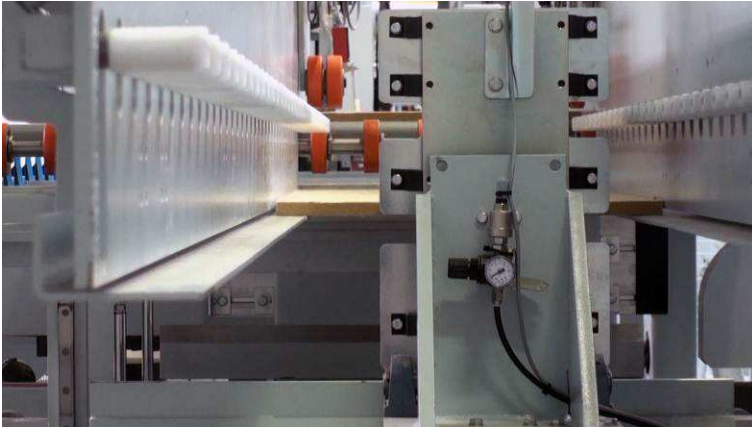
Angular transfer on two levels with hinging rails for wood fiberboard panels
